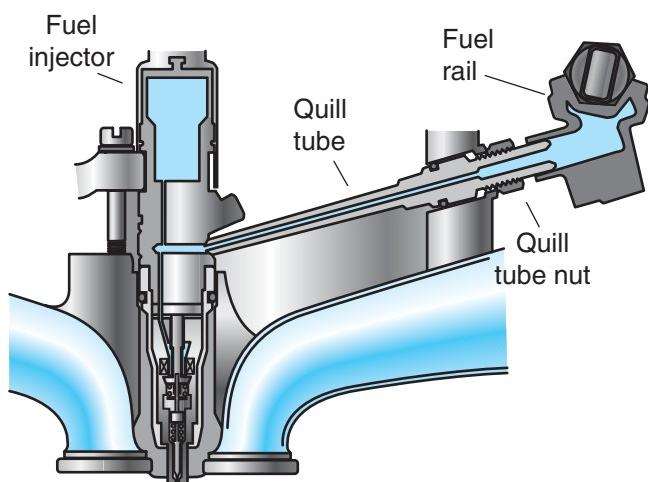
Sectional view of a Caterpillar C9 engine showing how the fuel quill mates into the EHI recess: the rail pipe connects to the quill tube. (Courtesy of Caterpillar)
